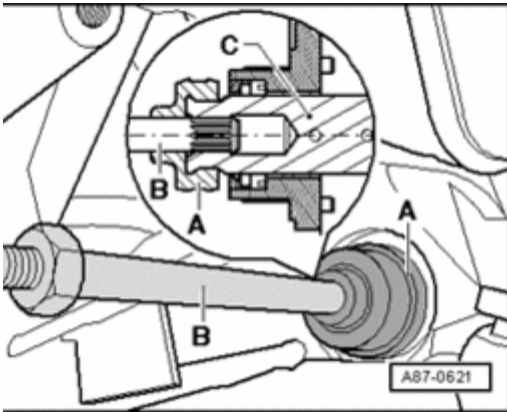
Removing/Installing Boot & Pulling Drive Shaft Out/In Of Splines Of Drive Pinion
